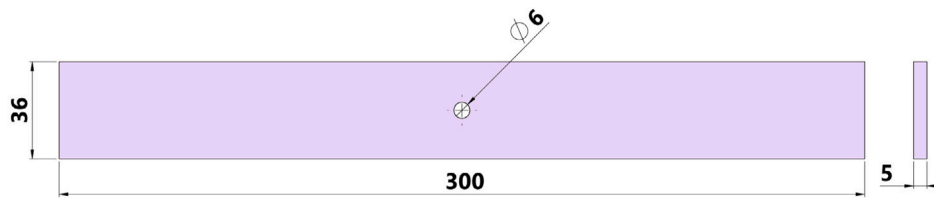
Schematic view of the open-hole sample (dimensions in millimeters).
